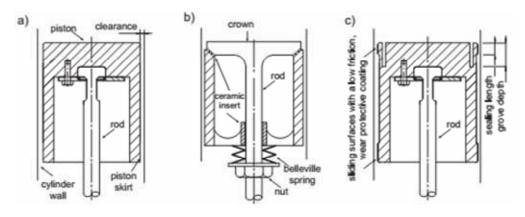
Candidate ringless piston designs for an oil-free piston compressor: a - clearance seal, b - the T-piston [3] and c - the U-piston
